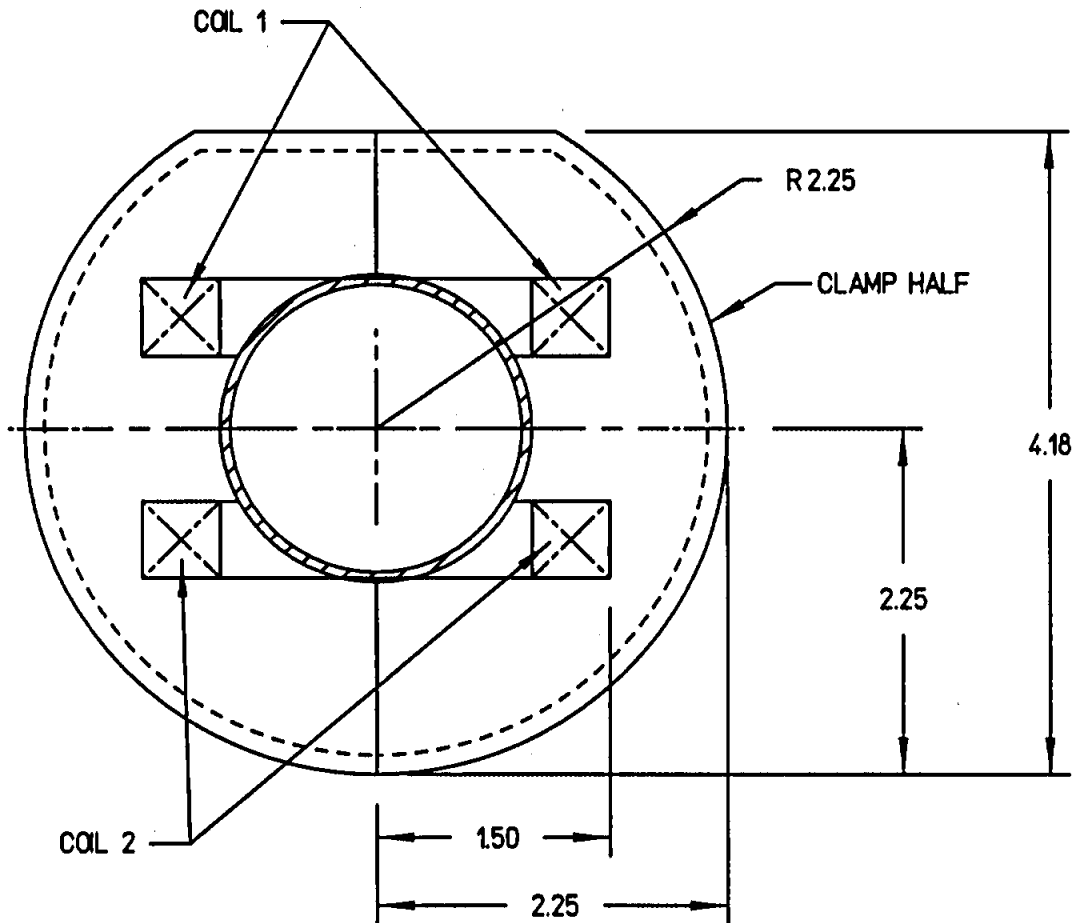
View showing two clamp halves symmetrically capturing two magnet coils to a 1" OD beampipe. Units are inches. Figure courtesy of D. Machie.
